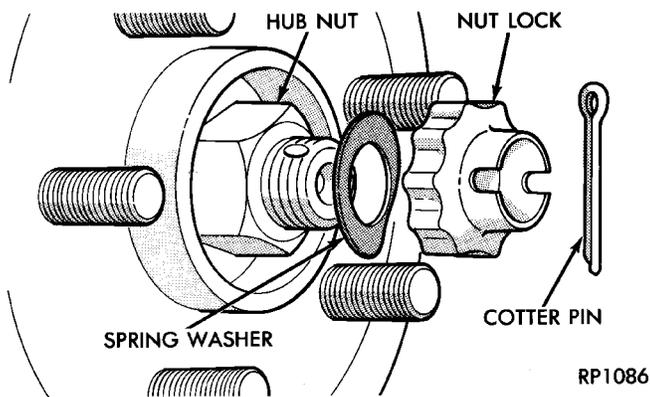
Spring Washer, Nut Lock, and New Cotter Pin
